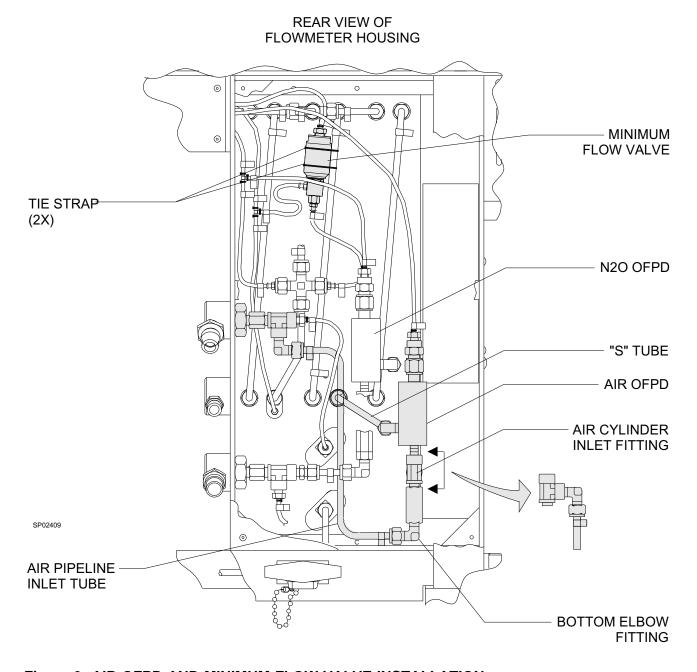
AIR OFPD AND MINIMUM FLOW VALVE INSTALLATION
